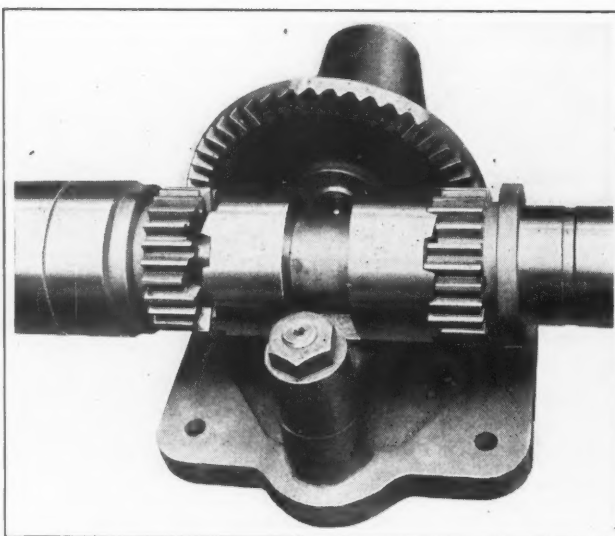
Reversible Face Gear Drive controlled by Clutch
